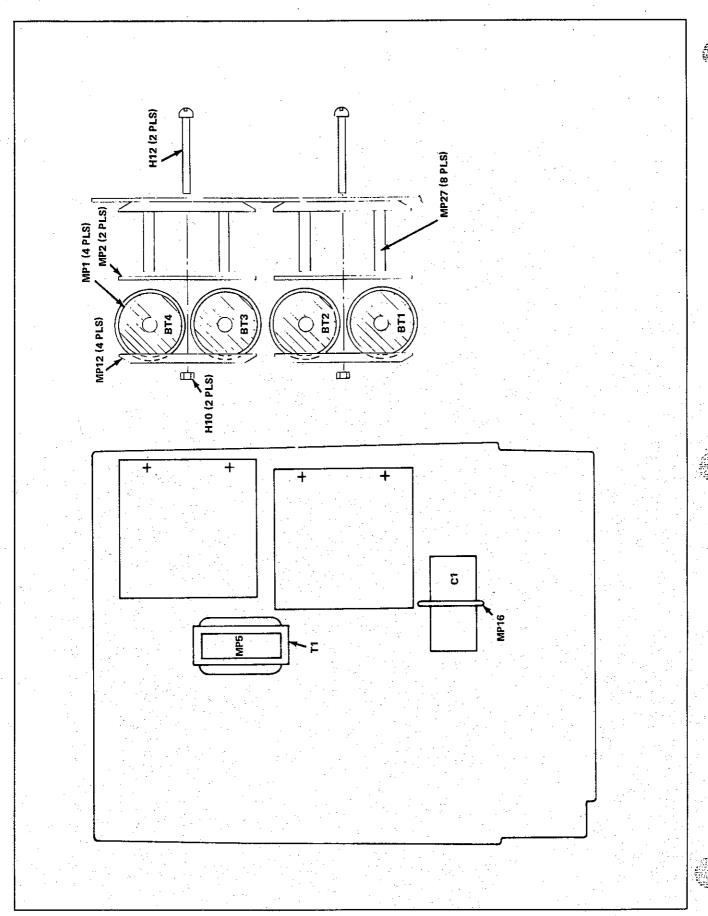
A1 Main PCB Assembly, Battery (cont)
